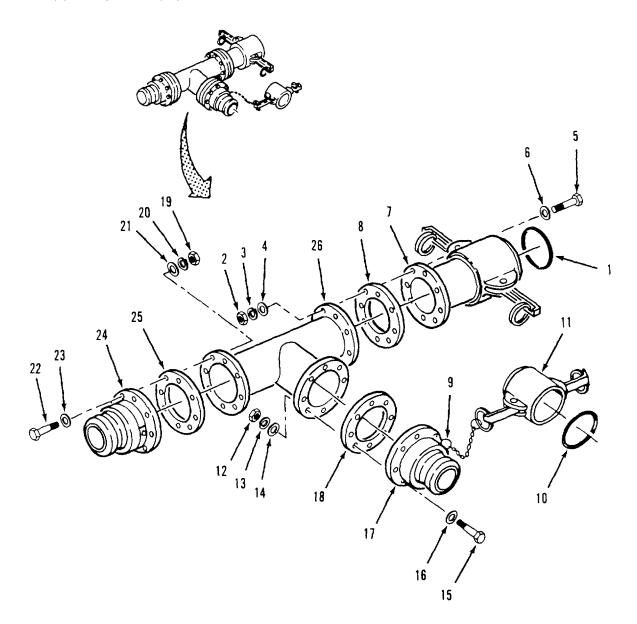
Tee Assembly (9112-Y2) Disassembly.
